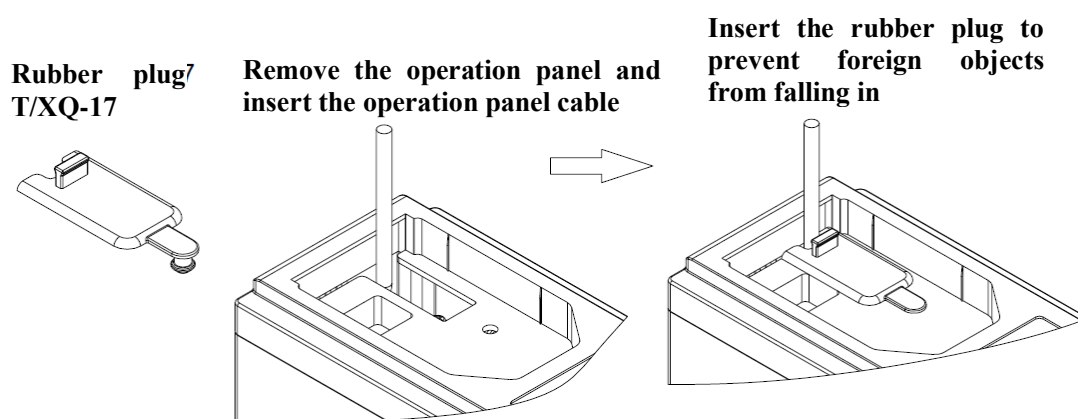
Assembly Diagram of Rubber Plug for External Lead of Hope530G0.75~7.5T4-H Operation Panel
